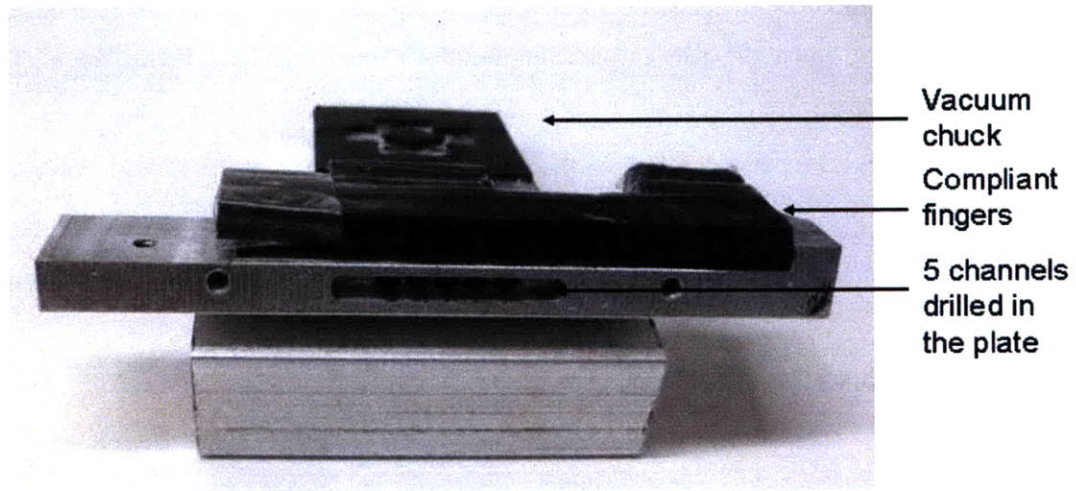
View of the vacuum chuck showing the channels precisely machined in the surface of a plate.
